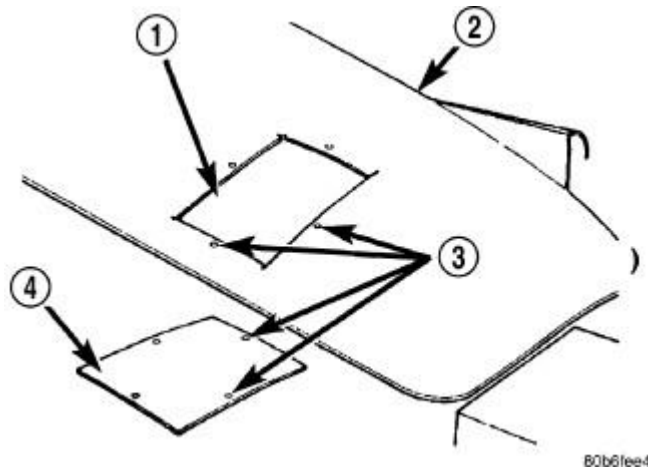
Locating Right Rear Axle To Crossmember Bolts
